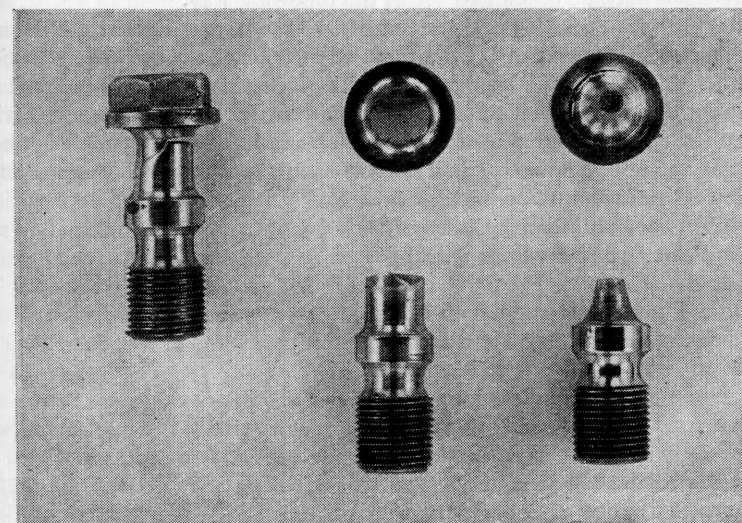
Modified M 12/1 bolt satisfactory in operation. Left: fatigue fracture, right: static fracture.
